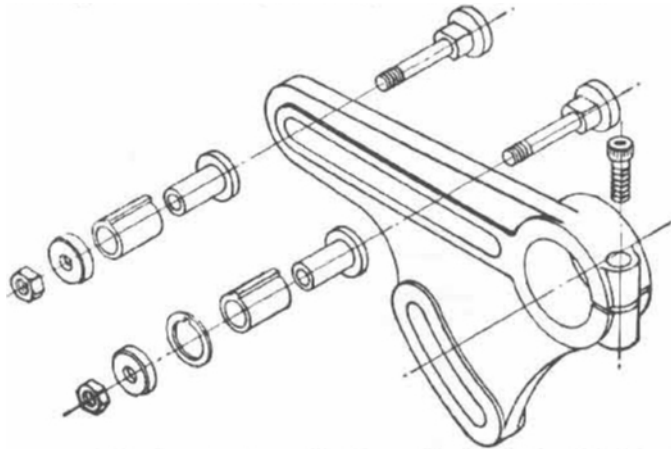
Slatted Quadrant (with movable changewheel studs "exploded" to show construction).
